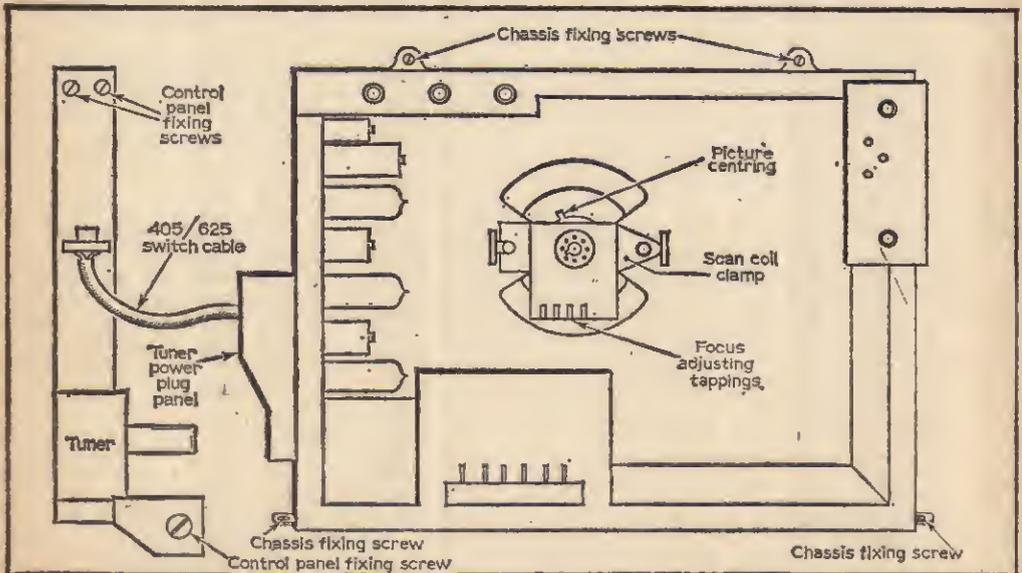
A V873 series receiver viewed from the rear, showing the component layout.
